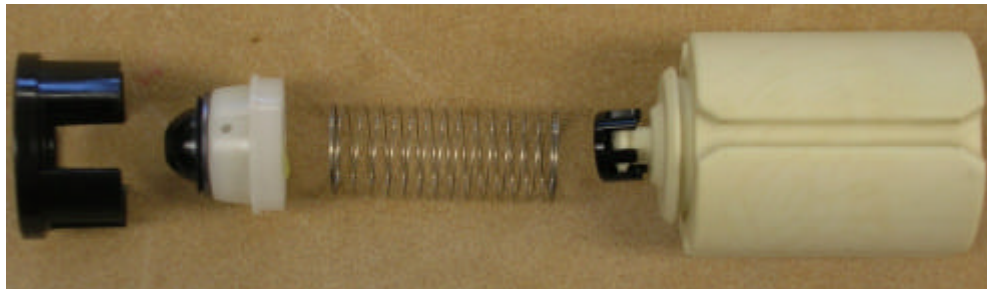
Ford Mustang fuel vapour port plunger - disassembled.
